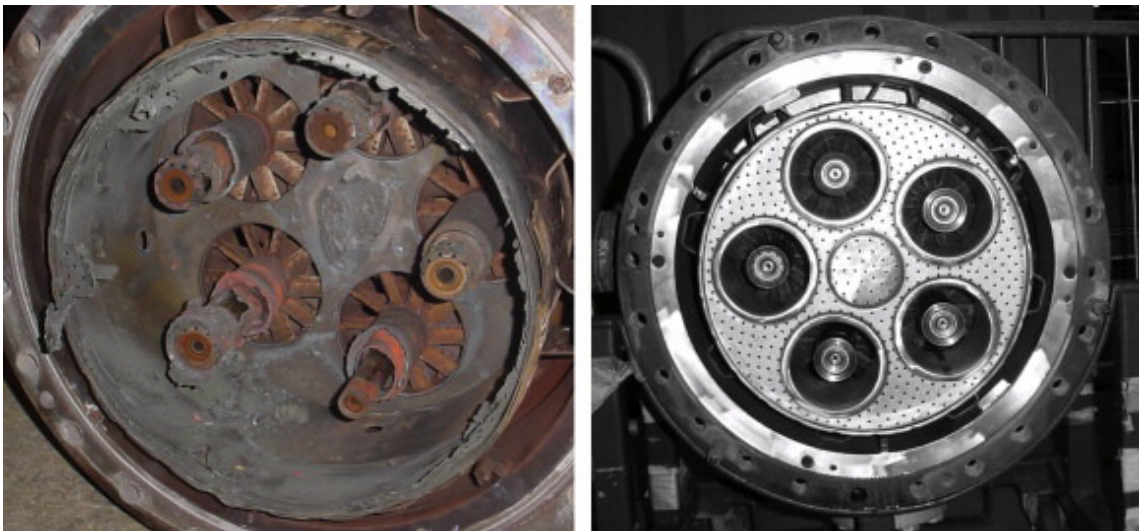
Damaged (left) and undamaged (right) burner assembly. Reproduced from [16, 17].
